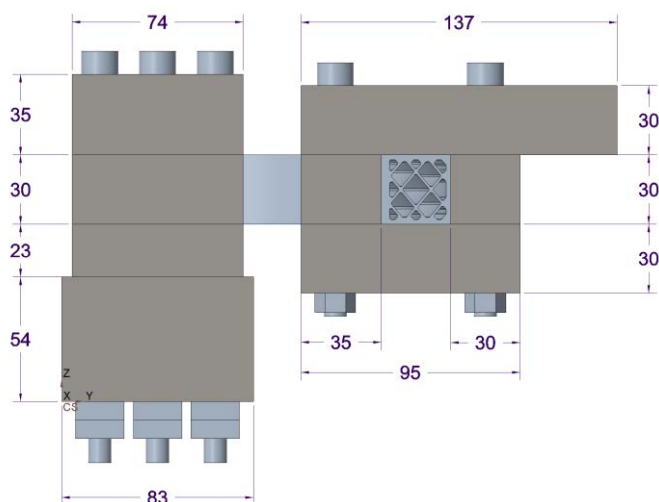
Side view of the clamping system with the main dimensions indicated (mm).
